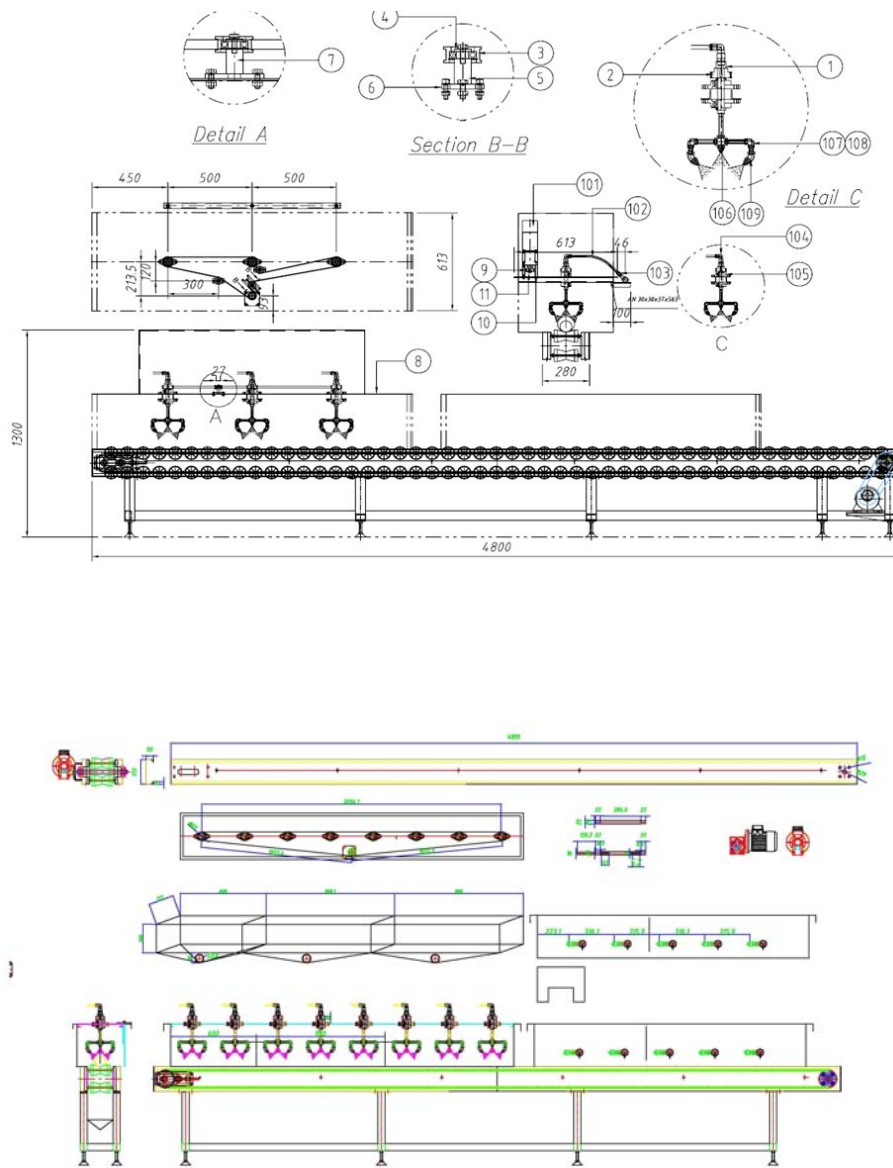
Detail drawing of washing/sterilization/dehydration system on Yuza
